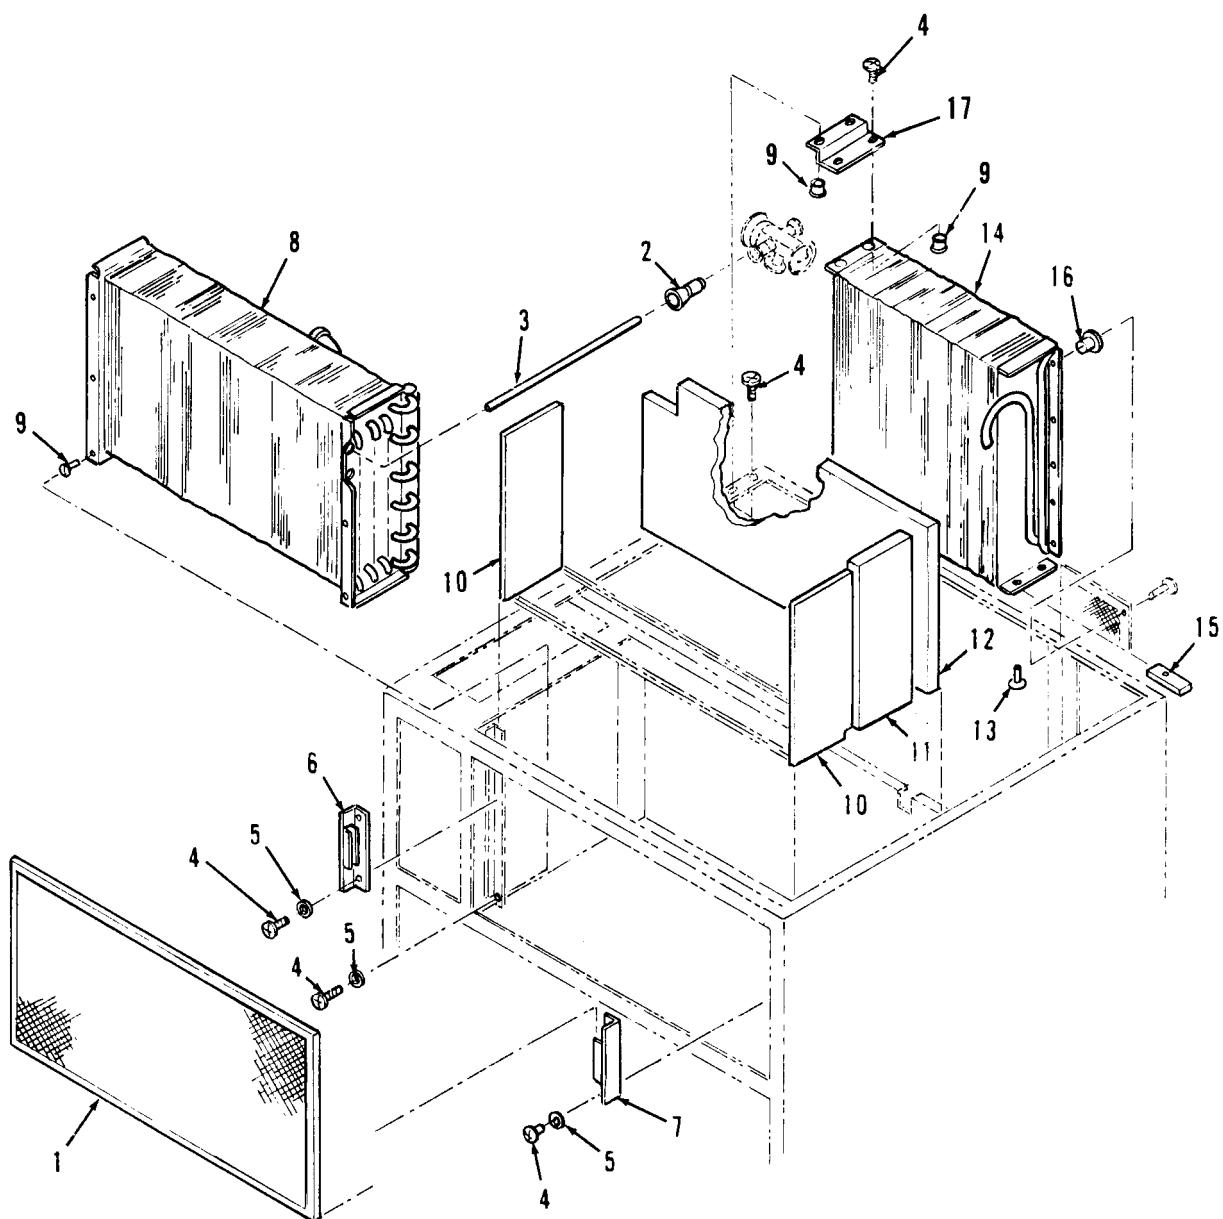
Mist Eliminator, Condenser and Evaporator Coils and Related Parts
